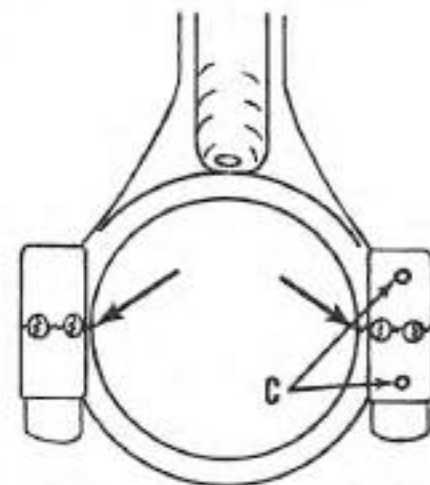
Uneven fractured parting line of rod and cap (shown by arrows) assures positive fit after assembly. Be sure correlation marks (C) are aligned.
